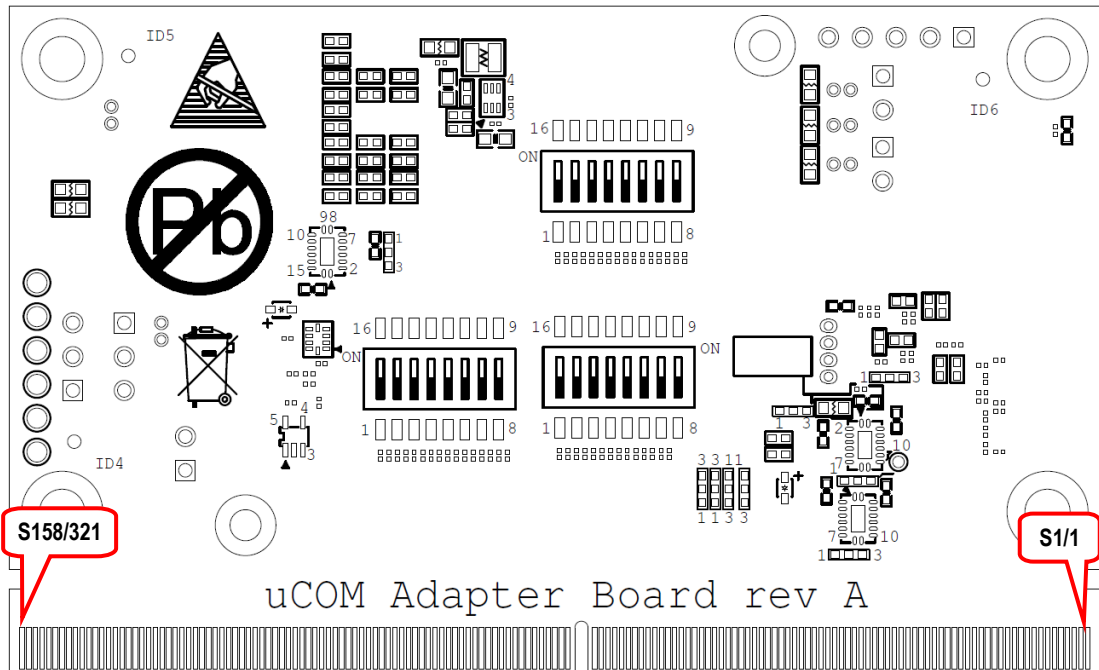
uCOM Adapter Board Pin Numbering, Bottom Side
